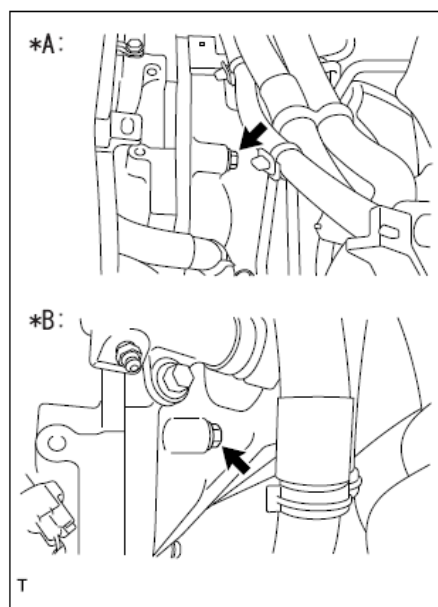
Supporting Transmission Assembly Clutch Housing Portion
